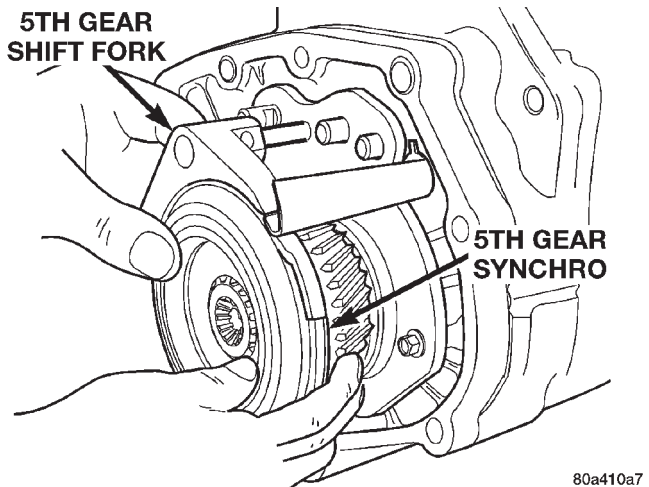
5th Gear Shift Fork, Rail, and Synchronizer
